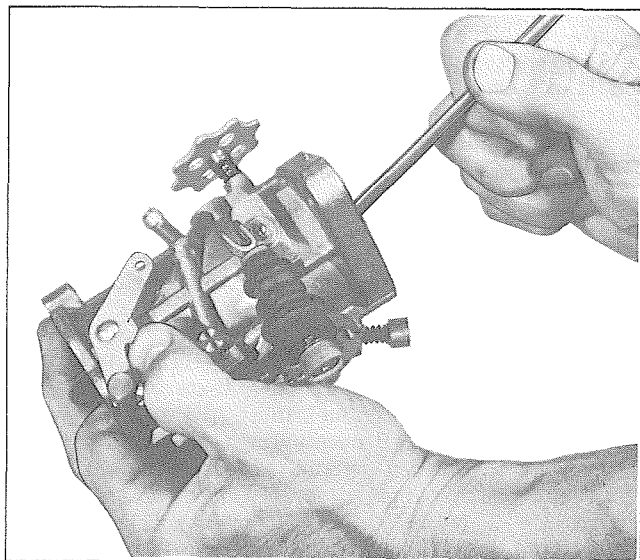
F-7B. Checking Main Nozzle Ball Check Valve for Leakage
